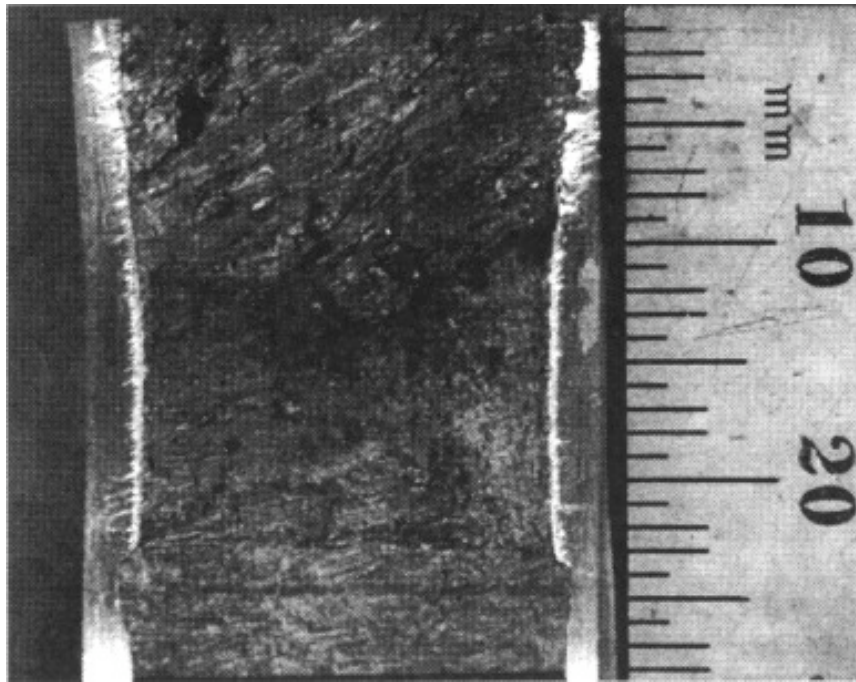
Fracture surface of aged weld metal PWWO tested at 25°C
